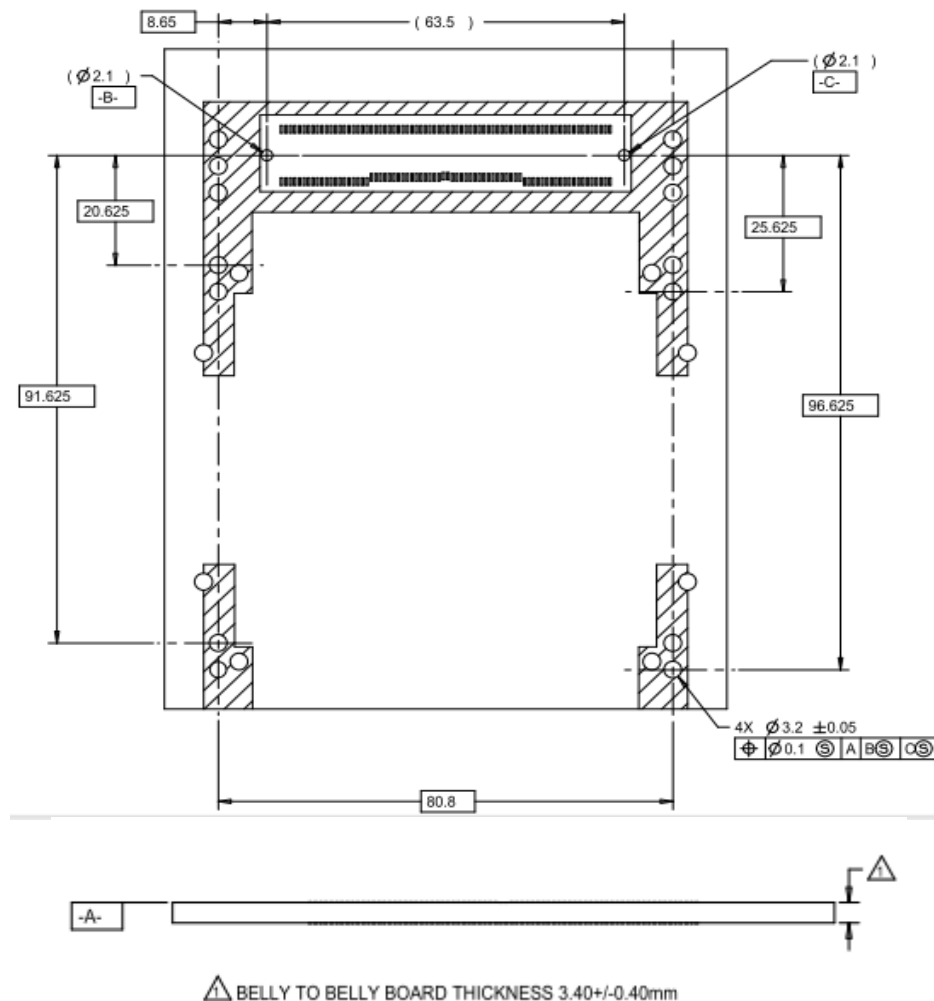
Mechanical Dimensions of Electrical Connectors on CFP Host PCB
